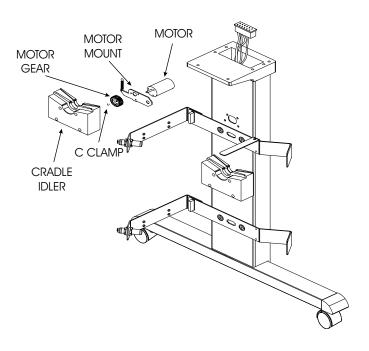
Media Take-Up and Feed Motor Removal. Remove the Thermal Dryer Assembly
